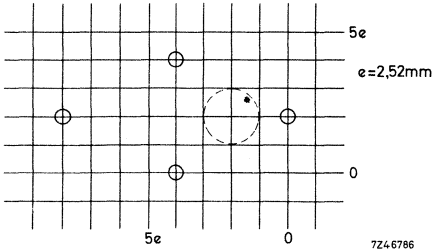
Hole pattern for mounting on a printed-wiring board (e = 2,54 mm (0,1 in)); hole diameter 1,3 ± 0,1 mm.
